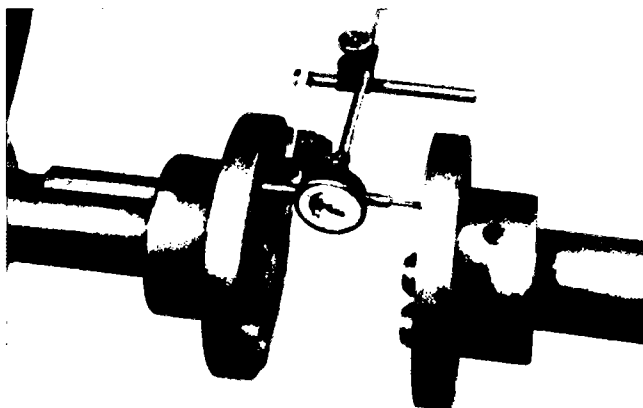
Checking angular alignment with dial indicator on coupling face.
